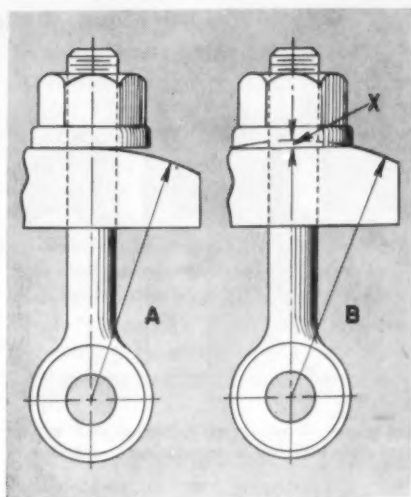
(A) Swinging bolt clamp assembly requiring only fraction turn of nut for clamping and unclamping; (B) assembly with full bearing washer having radius starting at edge.
